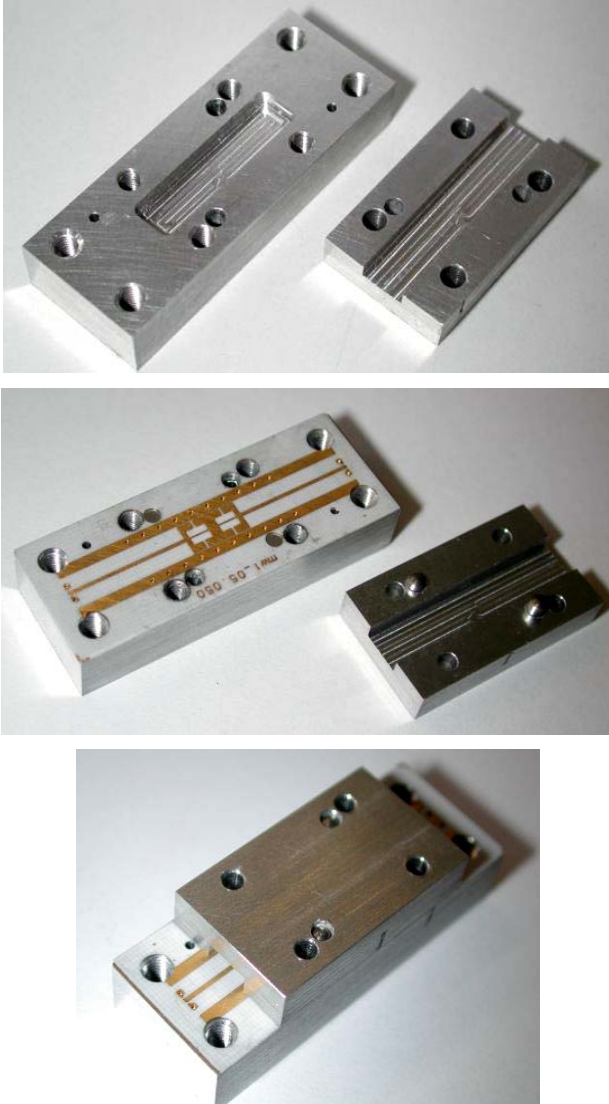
Photograph of the empty test mount (top) and a lowpass filter on extended substrate in the test mount. Center: opened block with filter, bottom: assembled test setup.
